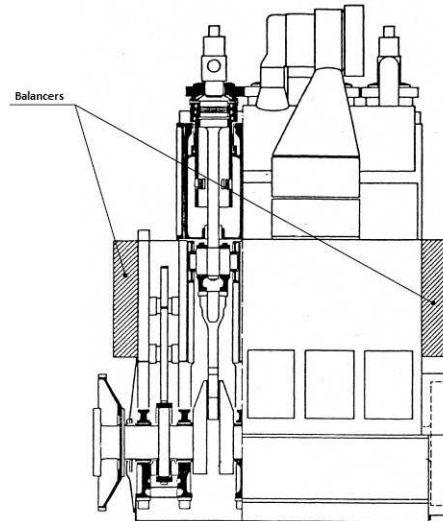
Lanchester Balancers (1- Camshaft; 2- C-weight; 3- Drive Chain; n) Crankshaft Rotation;
